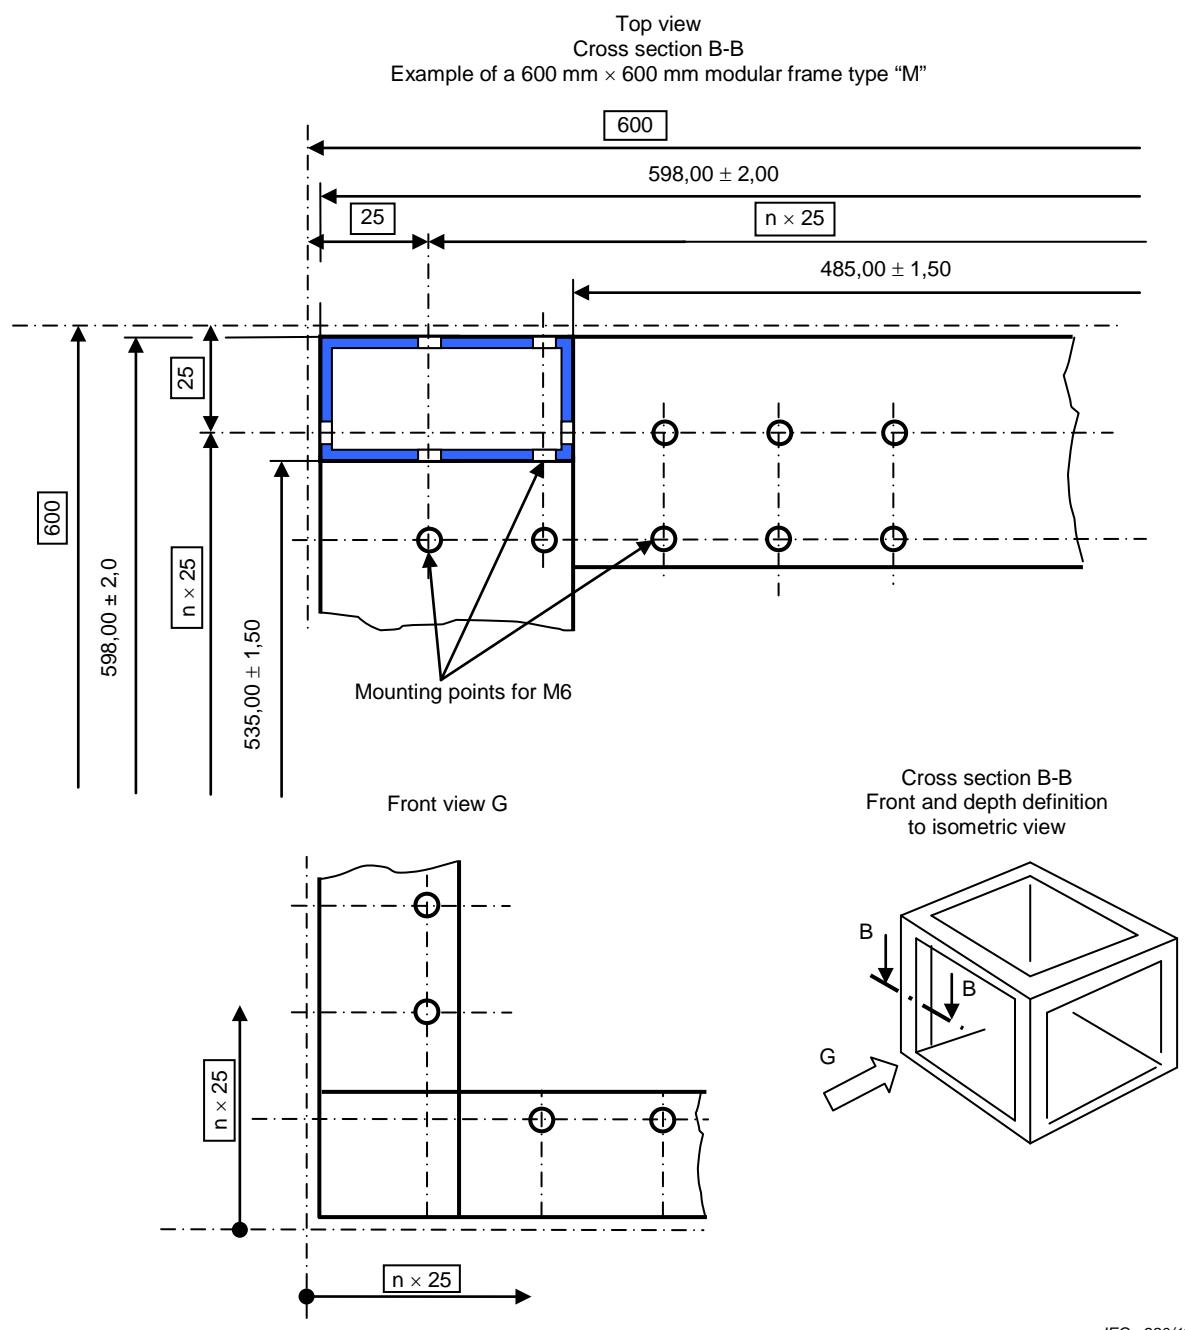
Modular frame type "M" 600 mm × 600 mm
